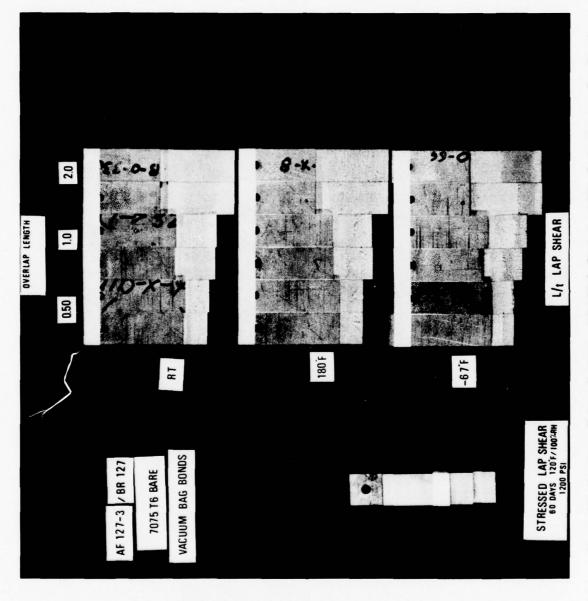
Specimen Failure Surfaces—AF 127-3, Optimized FPL Etch, Vacuum Bag Bonds
